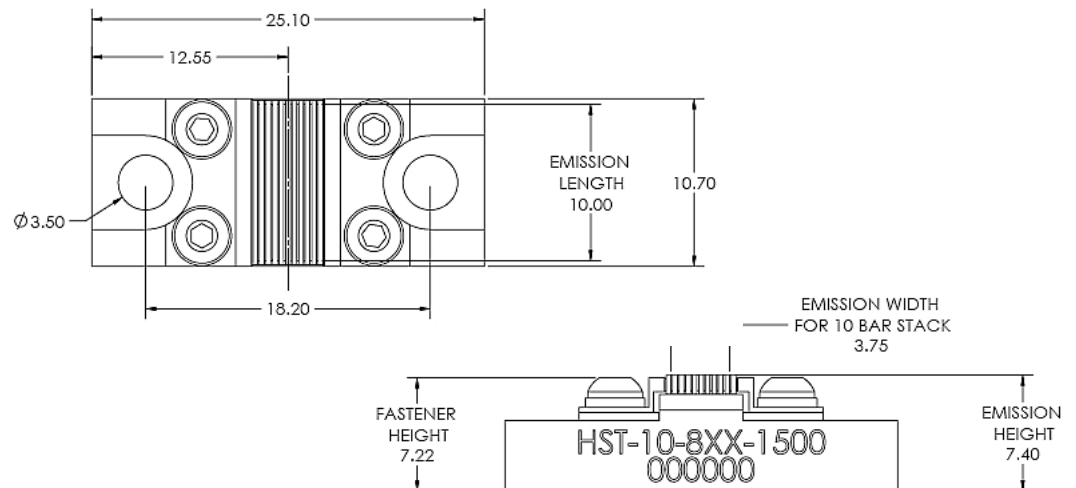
10-Bar Stacked Array Dimension Drawing (G-package version)
